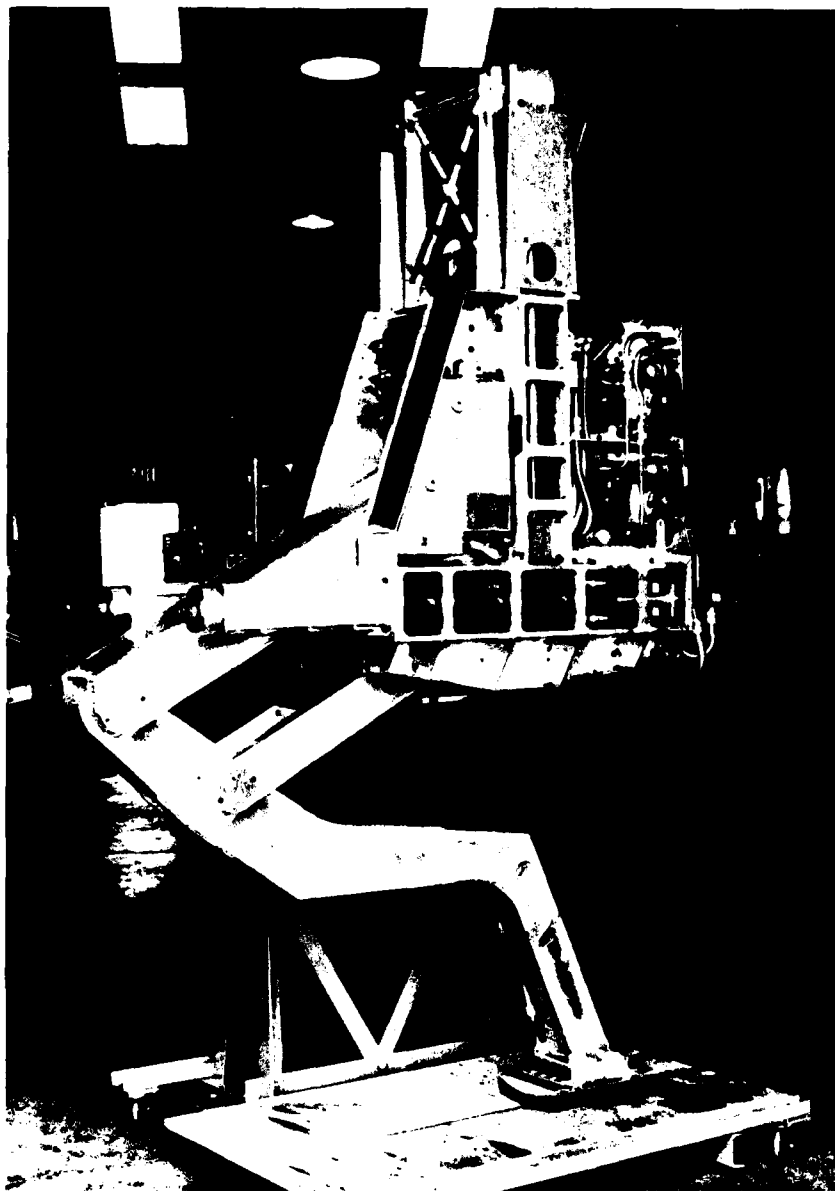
ASV leg on assembly stand. Cover plate has been removed to show internal structure and hydraulic components.
